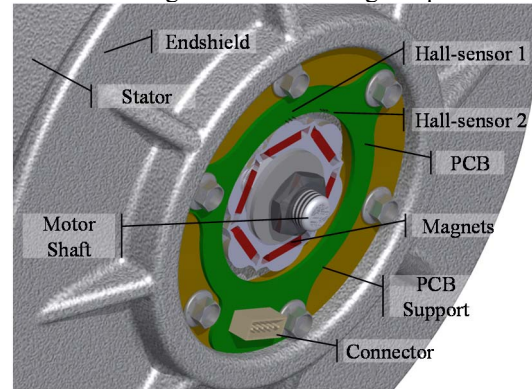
In-shaft type magnetic resolver inserted in an endshield of a machine.
